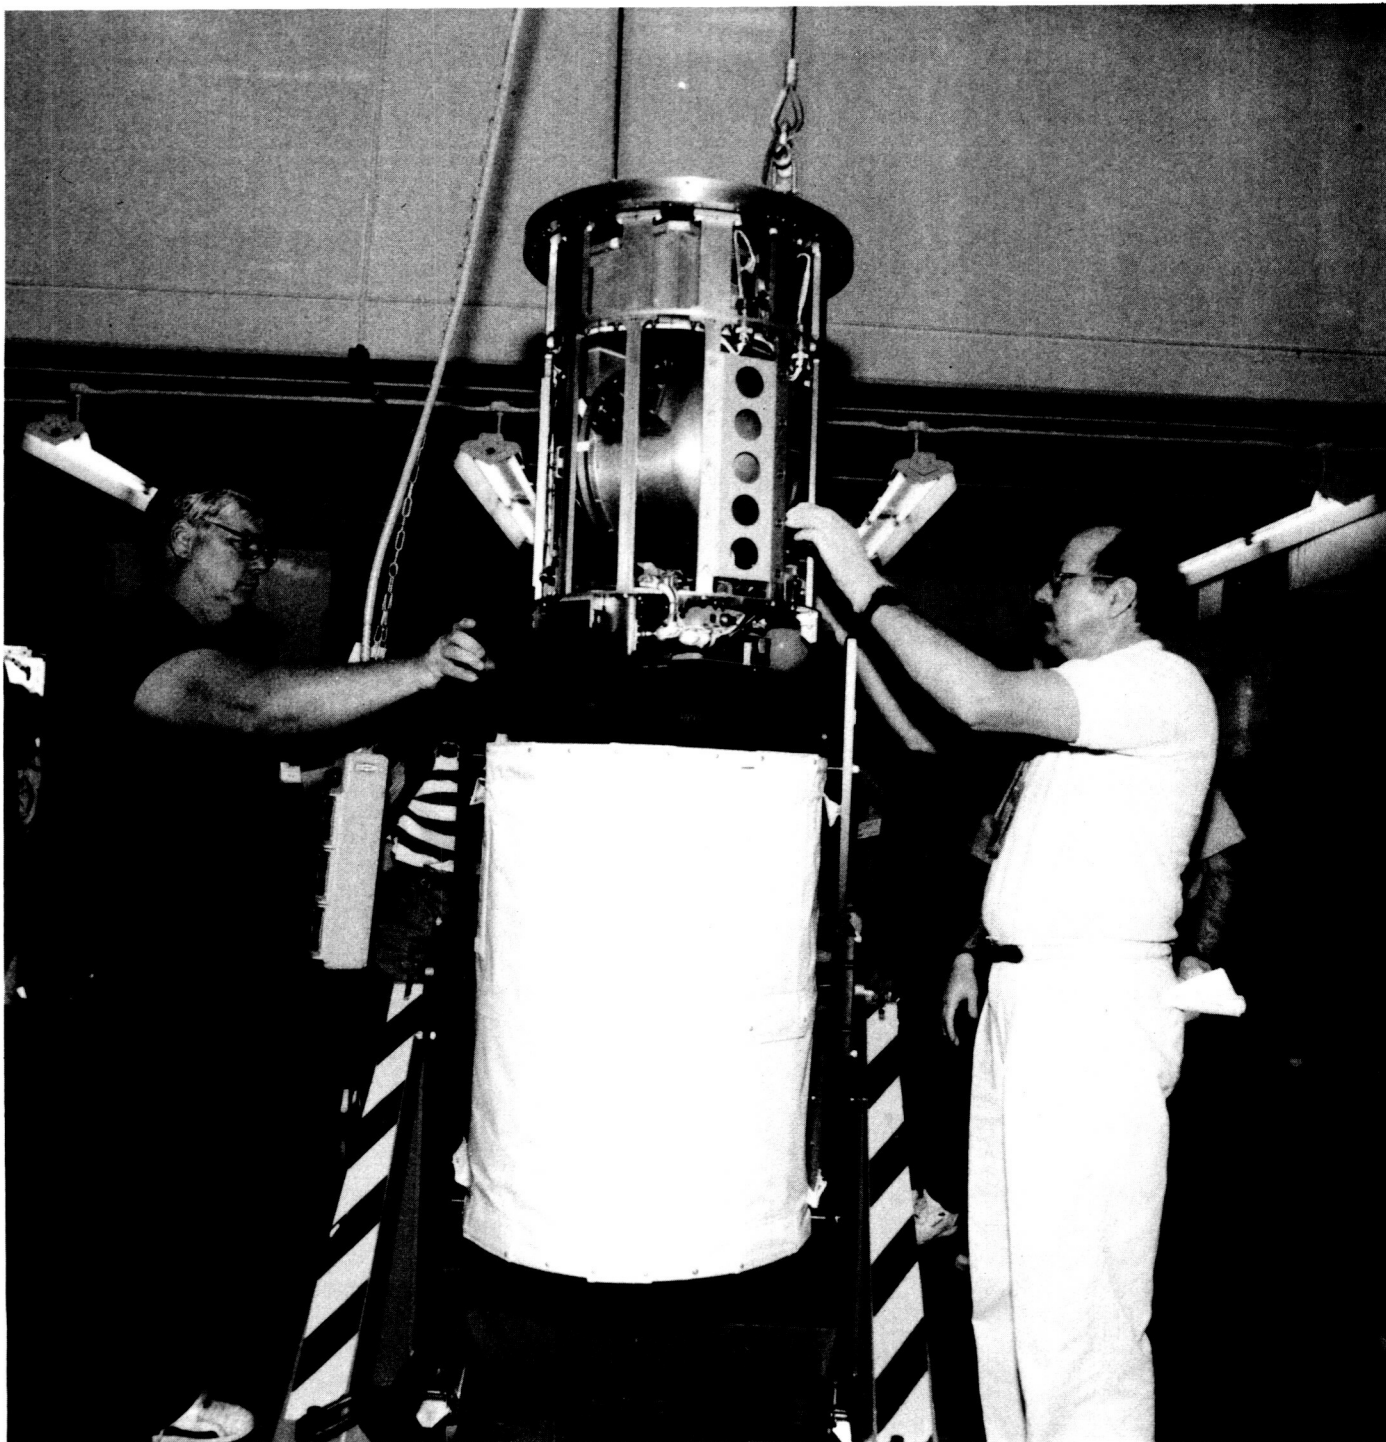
STS-57, G-535 installation into GAS Canister at GAS Facility
